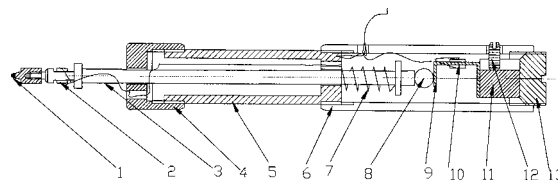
Structure of the scratch tester: diamond ball tip (1), strain gauges for friction force detection (2), shaft (3), supporting parts (4–6), spring (7), steel ball (8), SS plate (9), strain gauges for normal load detection (10), sliding block (11), tightening screw and nut (12, 13).
